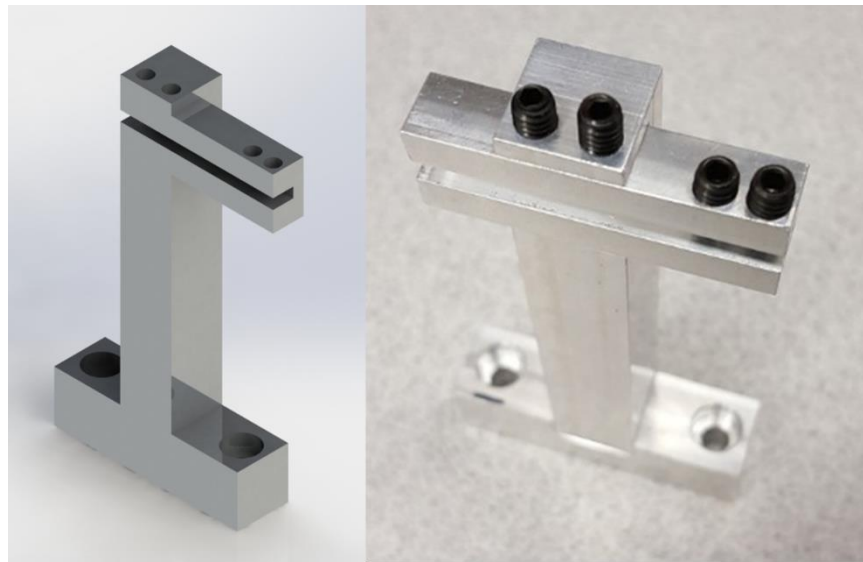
Fiber array unit holder. (Left) 3D CAD model and (Right) its machined aluminum part.
